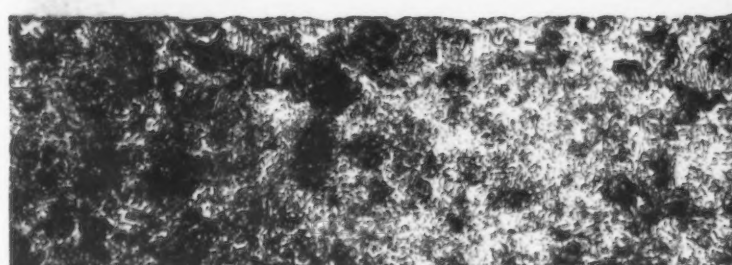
SUPERFINISHED AFTER GRINDING
